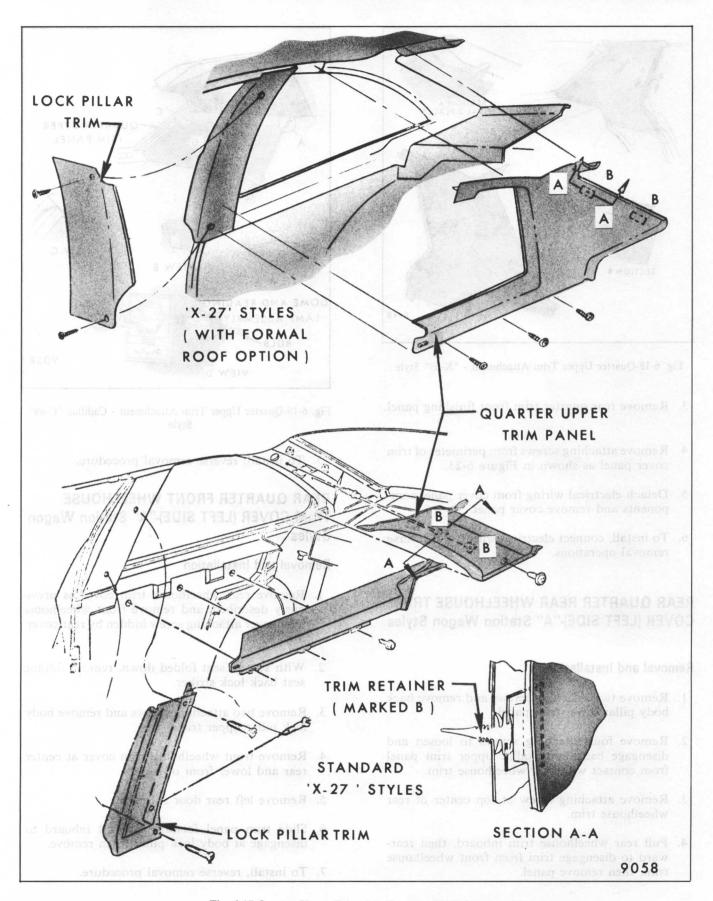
Quarter Upper Trim Attachment - "X-27" Styles
